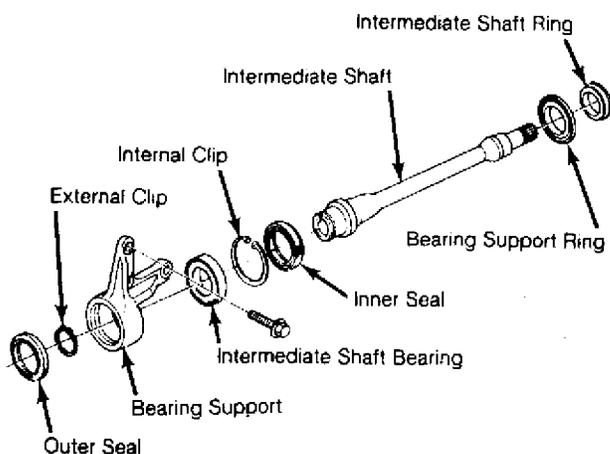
Exploded View Of Intermediate Shaft Assembly (Typical)
